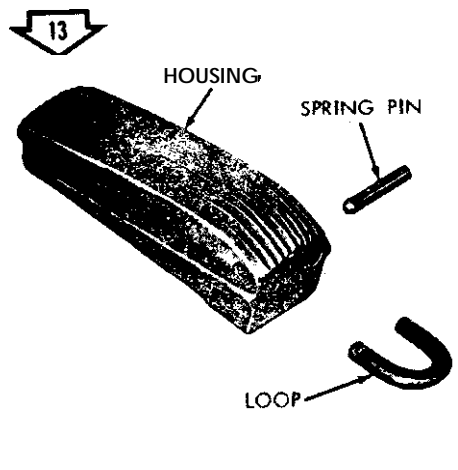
Disassembly/assembly of receiver group (3 of 7).
